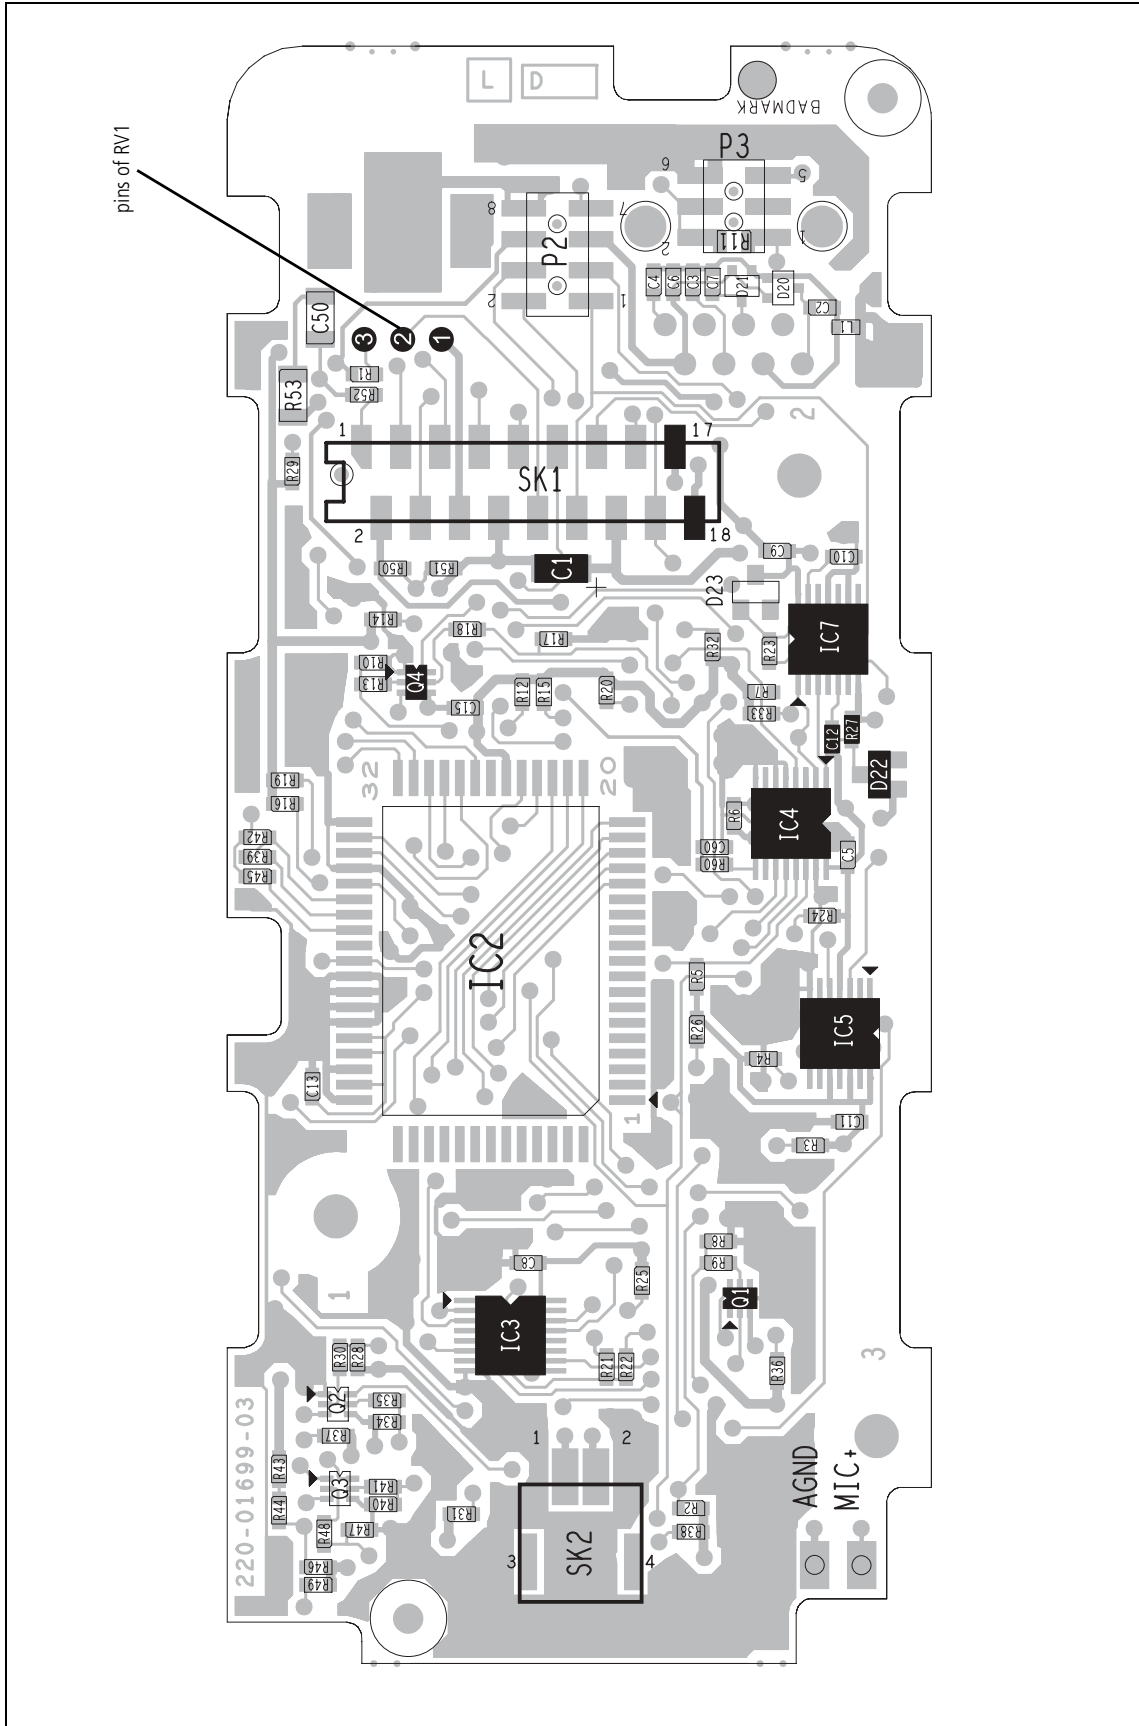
Bottom side of the control-head board (2-digit control head shown)
